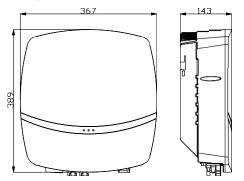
Dimensions of R5-(3K-6K)-S2-15
